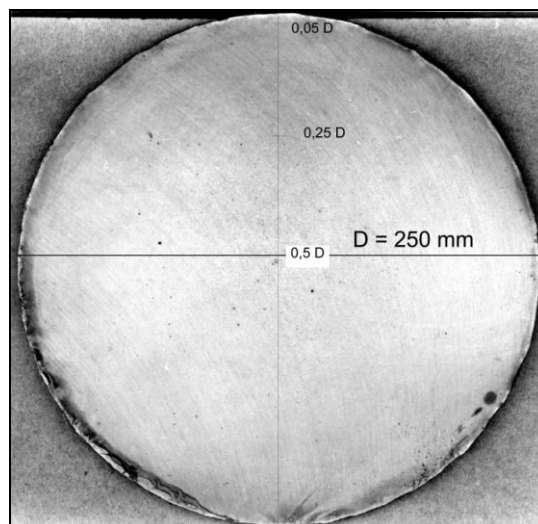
Macro-structure of the steel X160CrMoV 12 1 (EN 96 79), after forging on the radial forging machine: degree of forging  $K = 3.5$  (ingot K21, bar diameter 250 mm).
